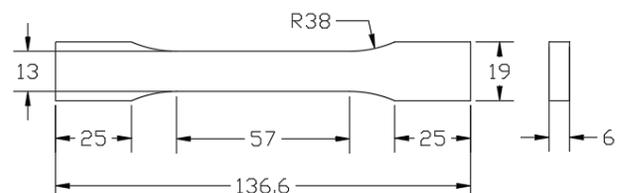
Geometry of the printed specimens for tensile tests (dimensions are in mm)
